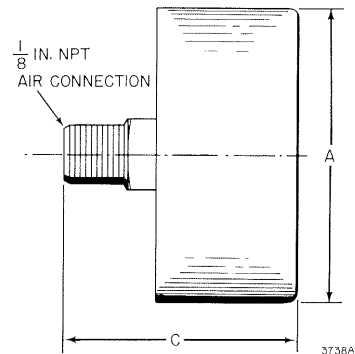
Stem-Mounted Gage Approximate Dimensions. Refer to Table 2.
